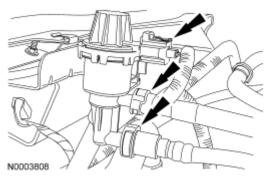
Vacuum Hose Courtesy of FORD MOTOR CO.
